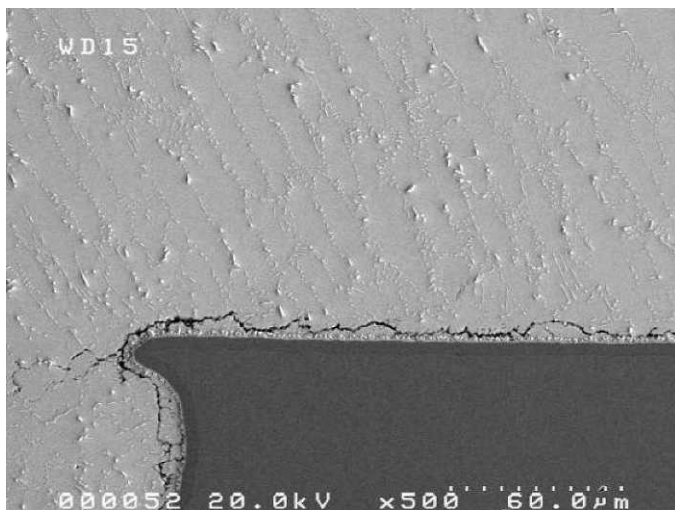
Board side failure of BGA with SAC305 solder on ENEPIG finish (170°C T_g board), × 500 magnification.
